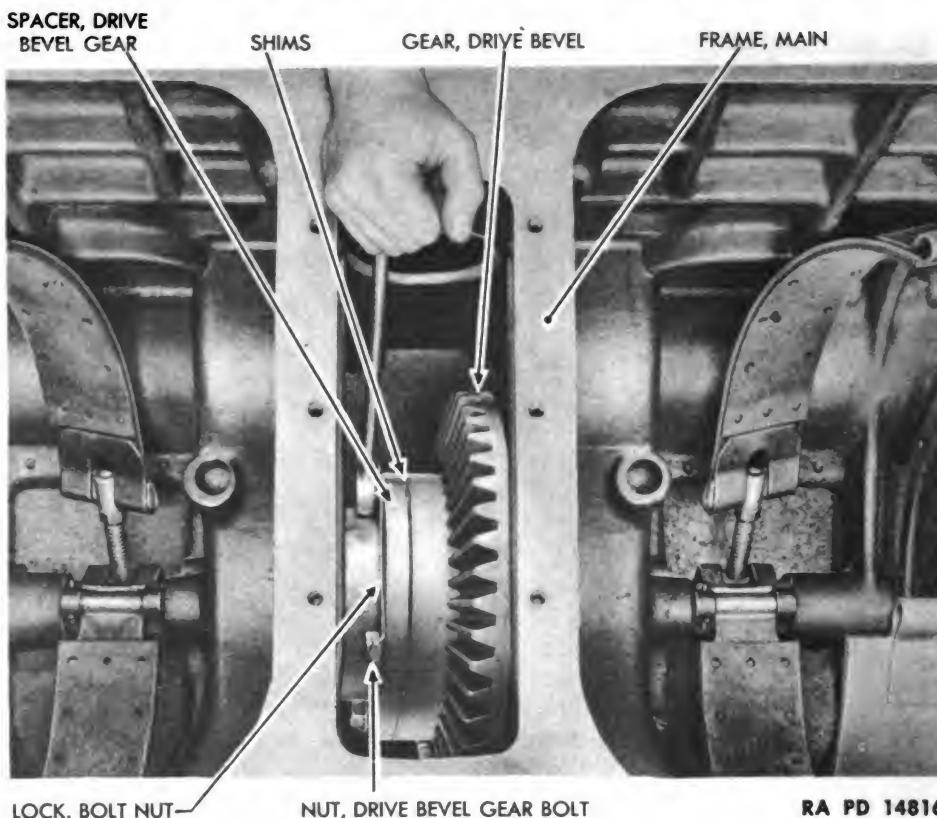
Left-Hand Drive Bevel Gear Bearing Cage Removal
